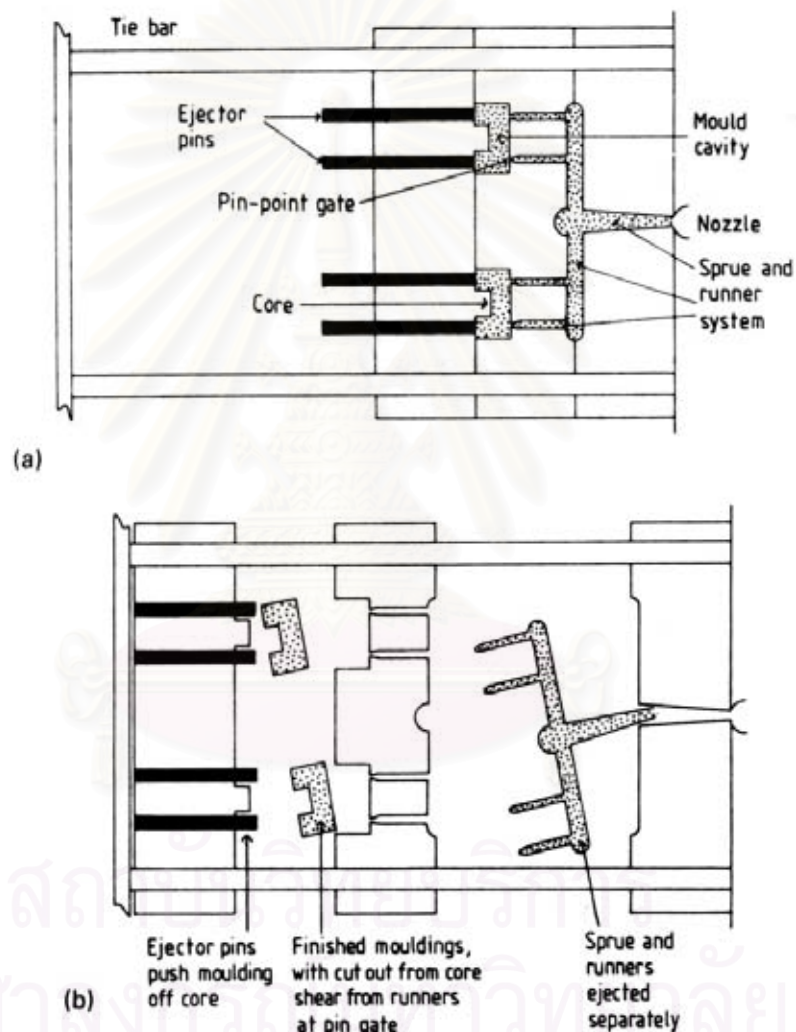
Three-plate mold; (a) closed mold; (b) opened mold
